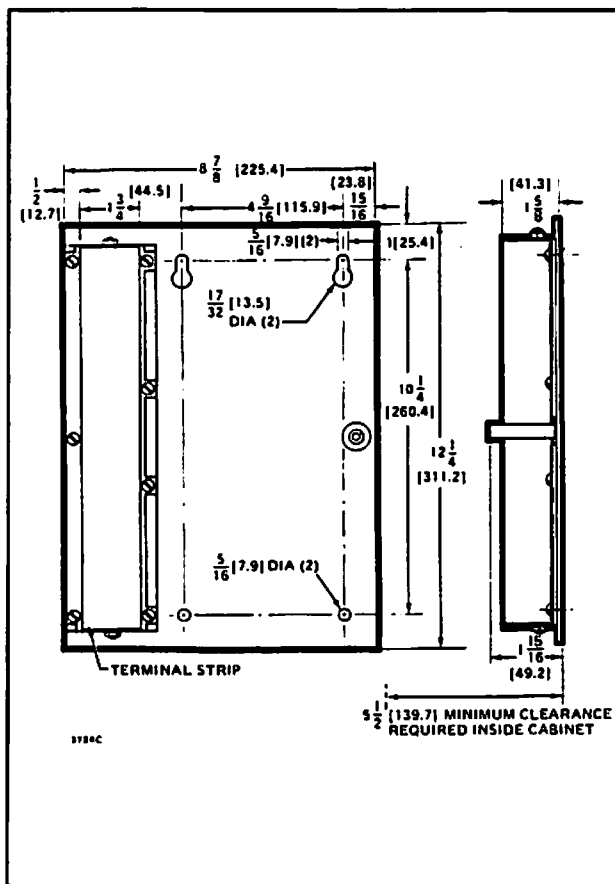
MOUNTING DIMENSIONS OF THE Q477A SUBBASE, IN INCHES [MILLIMETRES IN BRACKETS].
